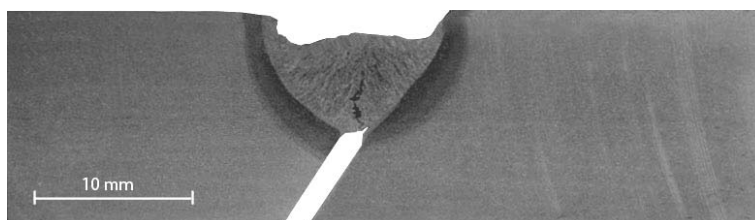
Cross-section of the W3 test joint with the visible crack initiated in weld root
